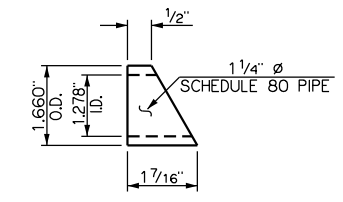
/8" Ø ANCHOR ROD ASSEMBLY
